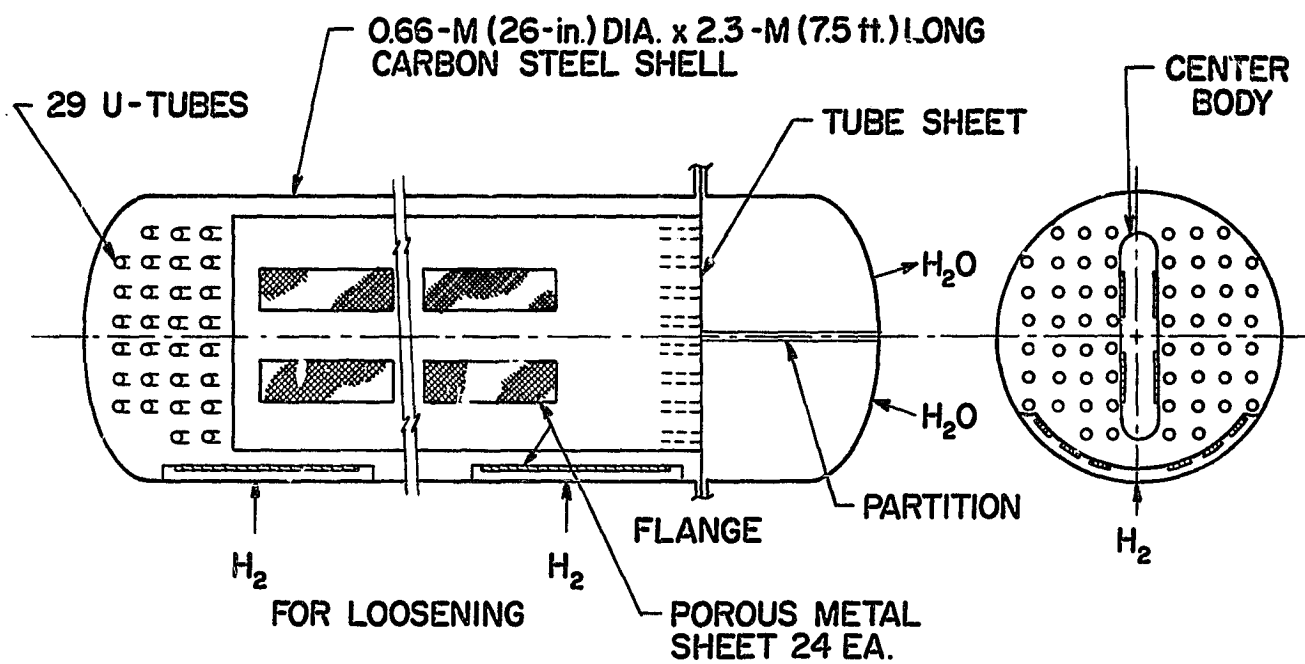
Sectional views of FWEC Variable-Parameter Test Unit showing major components.
